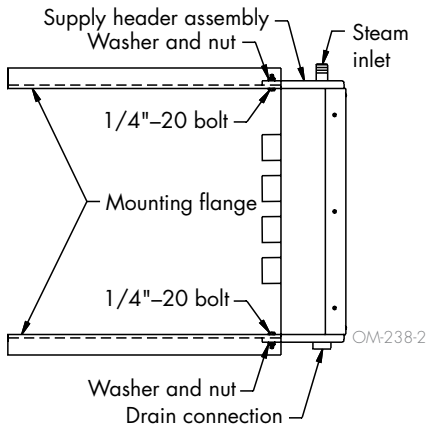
DETAIL VIEW OF MOUNTING FLANGE
